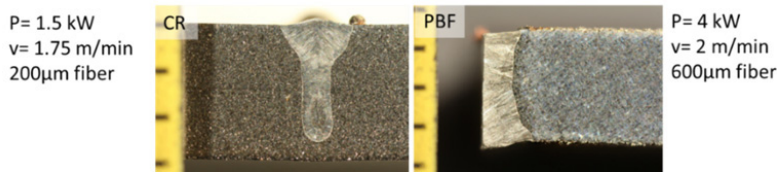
Examples of imperfections of the welds. Left: Cold rolled 316L, lack of penetration, right: PBF 316L cracked weld.
